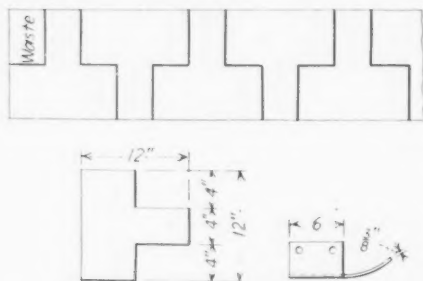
Showing, above, method of cutting bumper irons out of plate without waste except in corners; below, left, shape of iron before bending; and below, right, bumper iron after bending and drilling.
